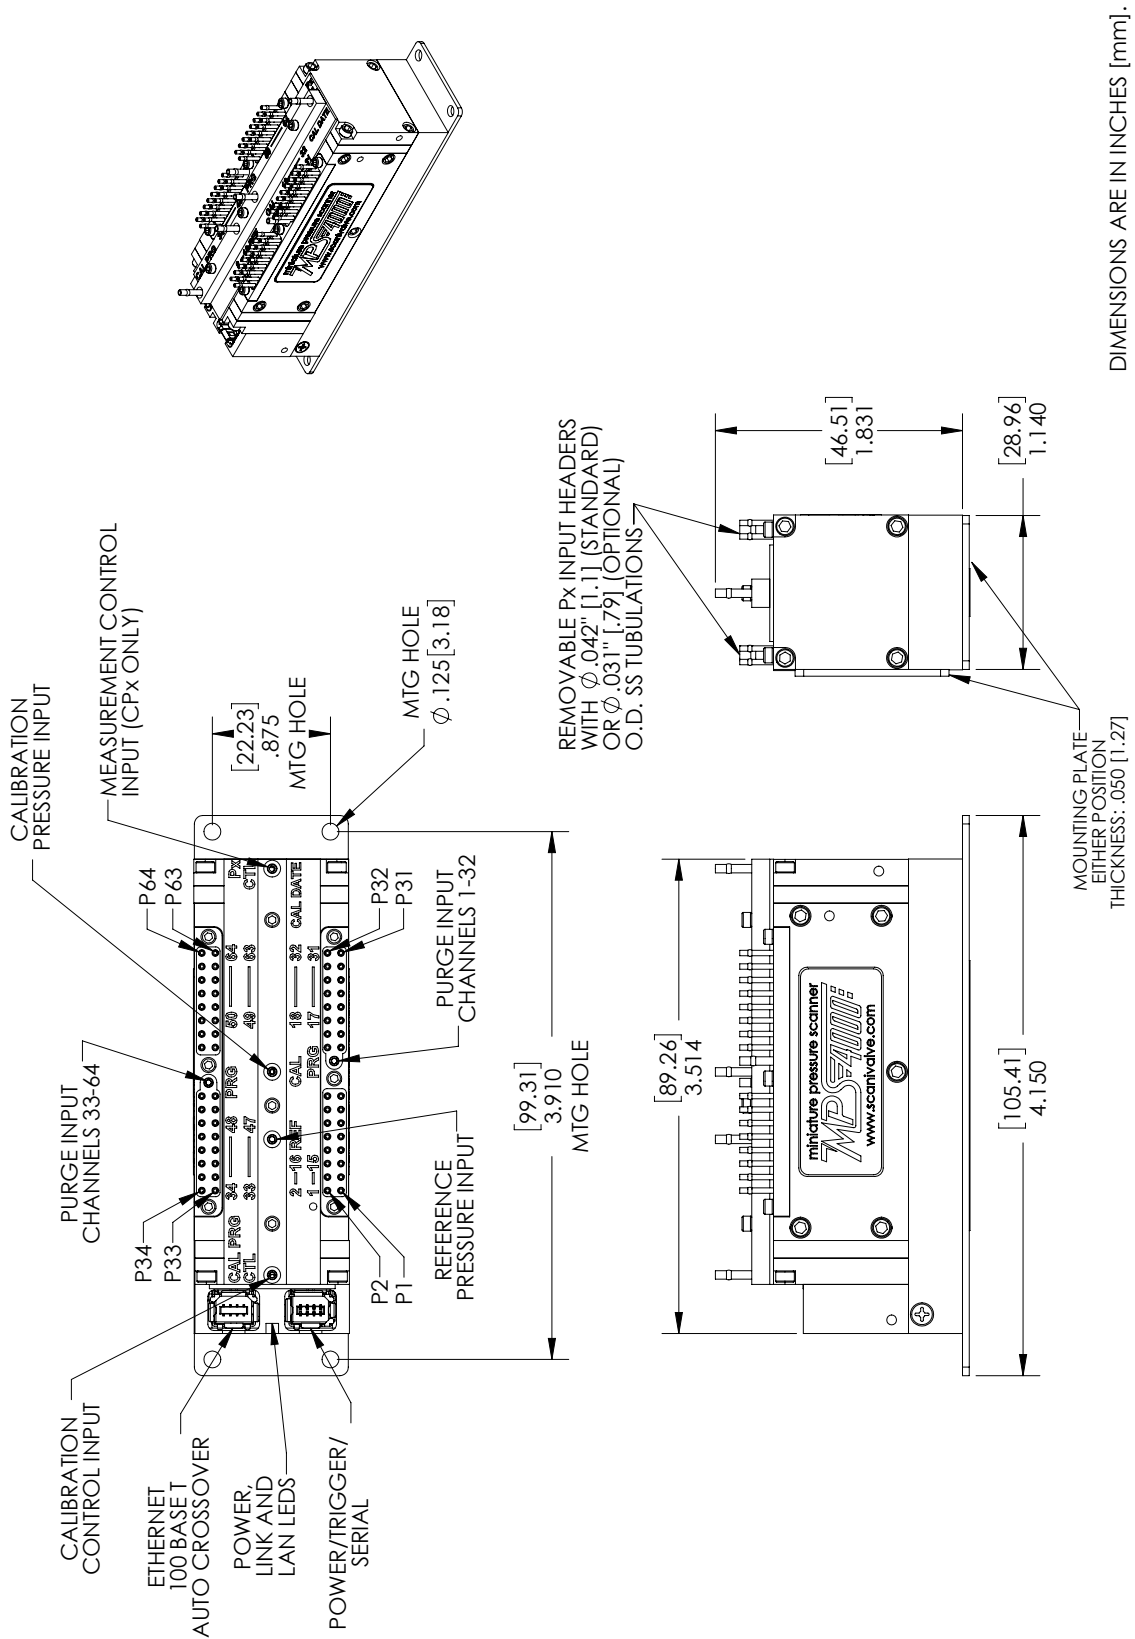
MPS4264 CPX AND NPX DIMENSIONAL DRAWING
